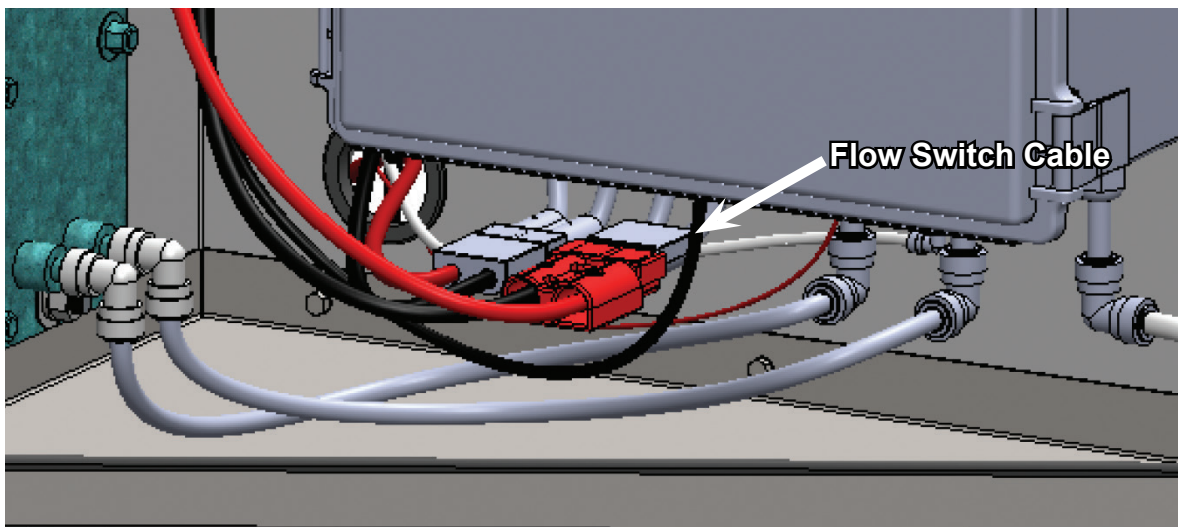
Locate Flow Switch Cable at Bottom of EWS Electrical Box
